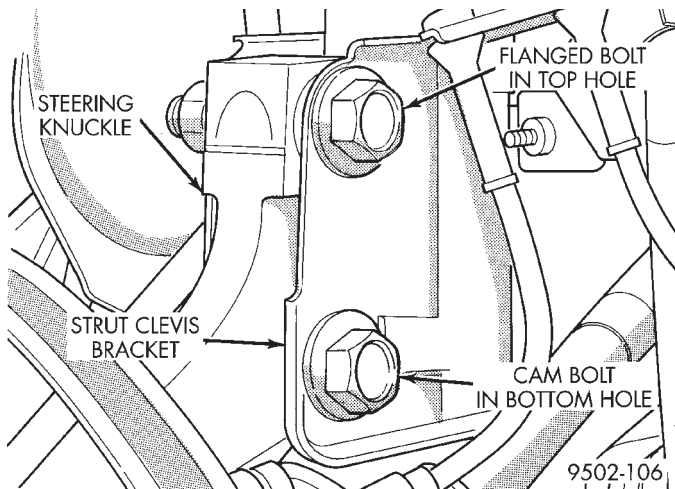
Correctly Installed Eccentric Attaching Bolt
